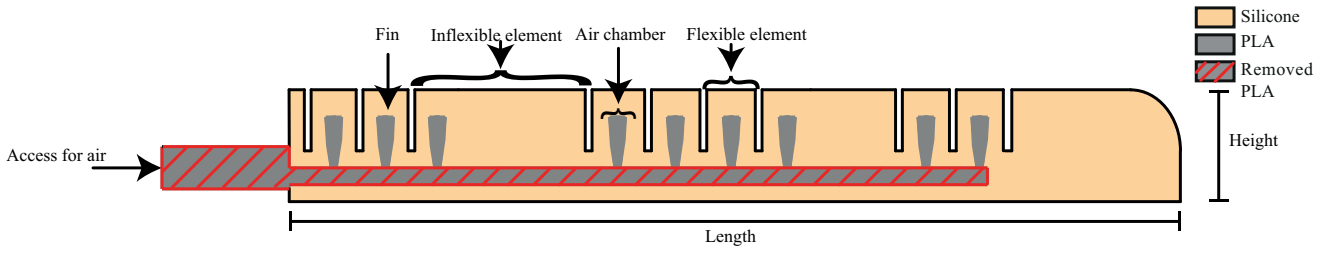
Schematic drawing of the design of the finger from the side. The red marked area is the PLA rod that will be removed. This will become the access for air when the rod is removed. The gray PLA fins will stay inside the silicone. The air chamber is the space between the fins and the silicone.
